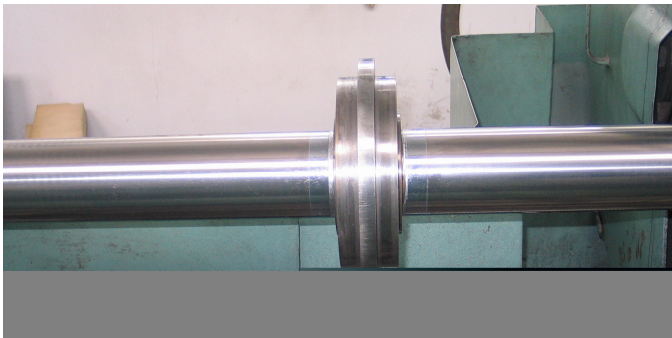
Rebuilt the hydraulic cylinder of the control actuator
